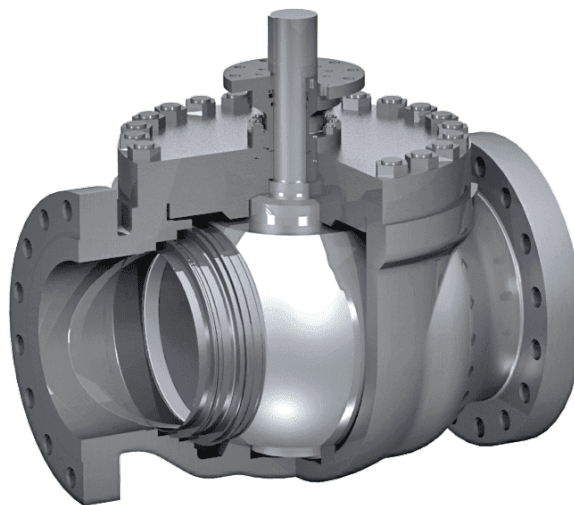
A ball valve with a top-entry design, allowing access to the inside of the valve without having to remove the valve from its line [11].
